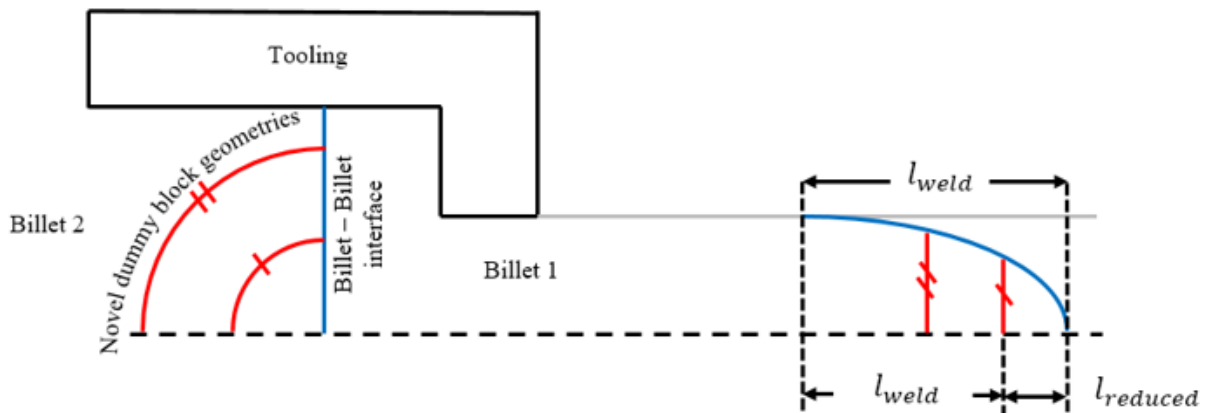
Flat, reduced length welds can be produced through concave, novel dummy block geometries.
